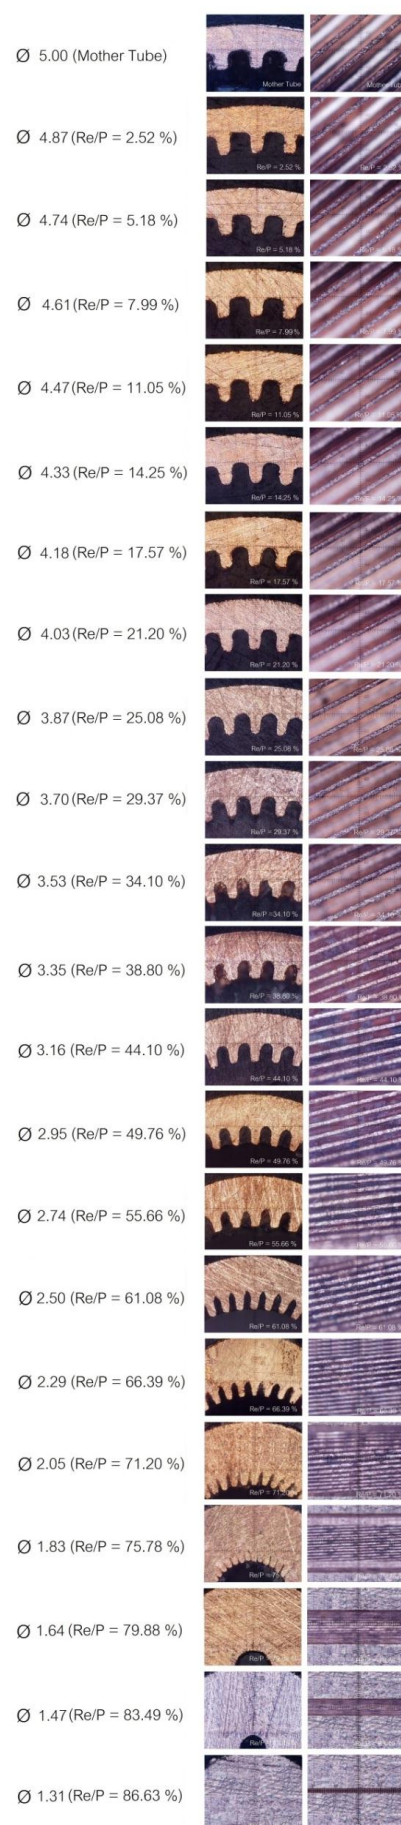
The cross-sectional and longitudinal profile of the inner spiral ribbed copper tubes using the tube sinking method for the maximum total reduction of 86.63% and $\alpha = 12^\circ$.
